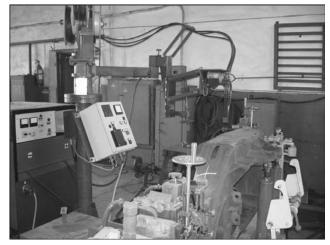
Experimental-industrial setup for hardfacing of guide surfaces of axle box opening of side frame of truck of the 18-100 model freight car
